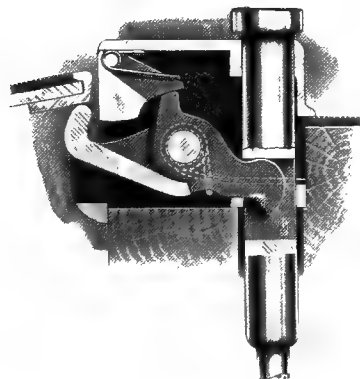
Section of Design H, Trap Door Lock, With Latch Releaser and Starting Device Forcing Door Open.
